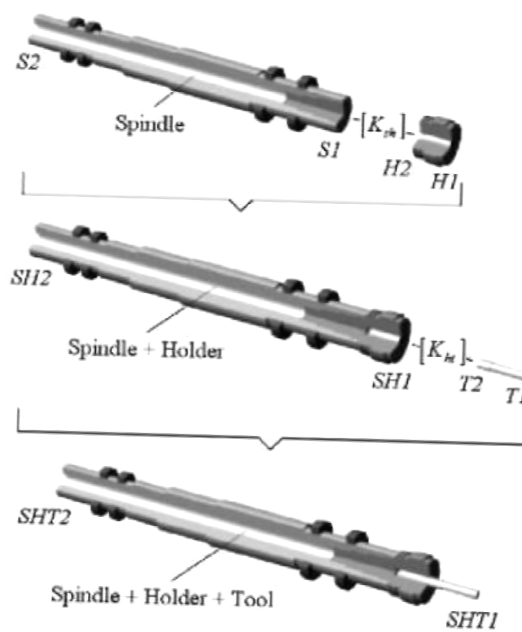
Components of Spindle-Holder-Tool Assembly and the Complex Stiffness Matrices of Spindle-Holder and Holder-Tool Interfaces (Özşahin et al., 2009)
